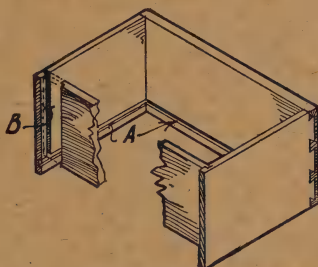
Inside View of Drawer, Showing Groove for Bottom
